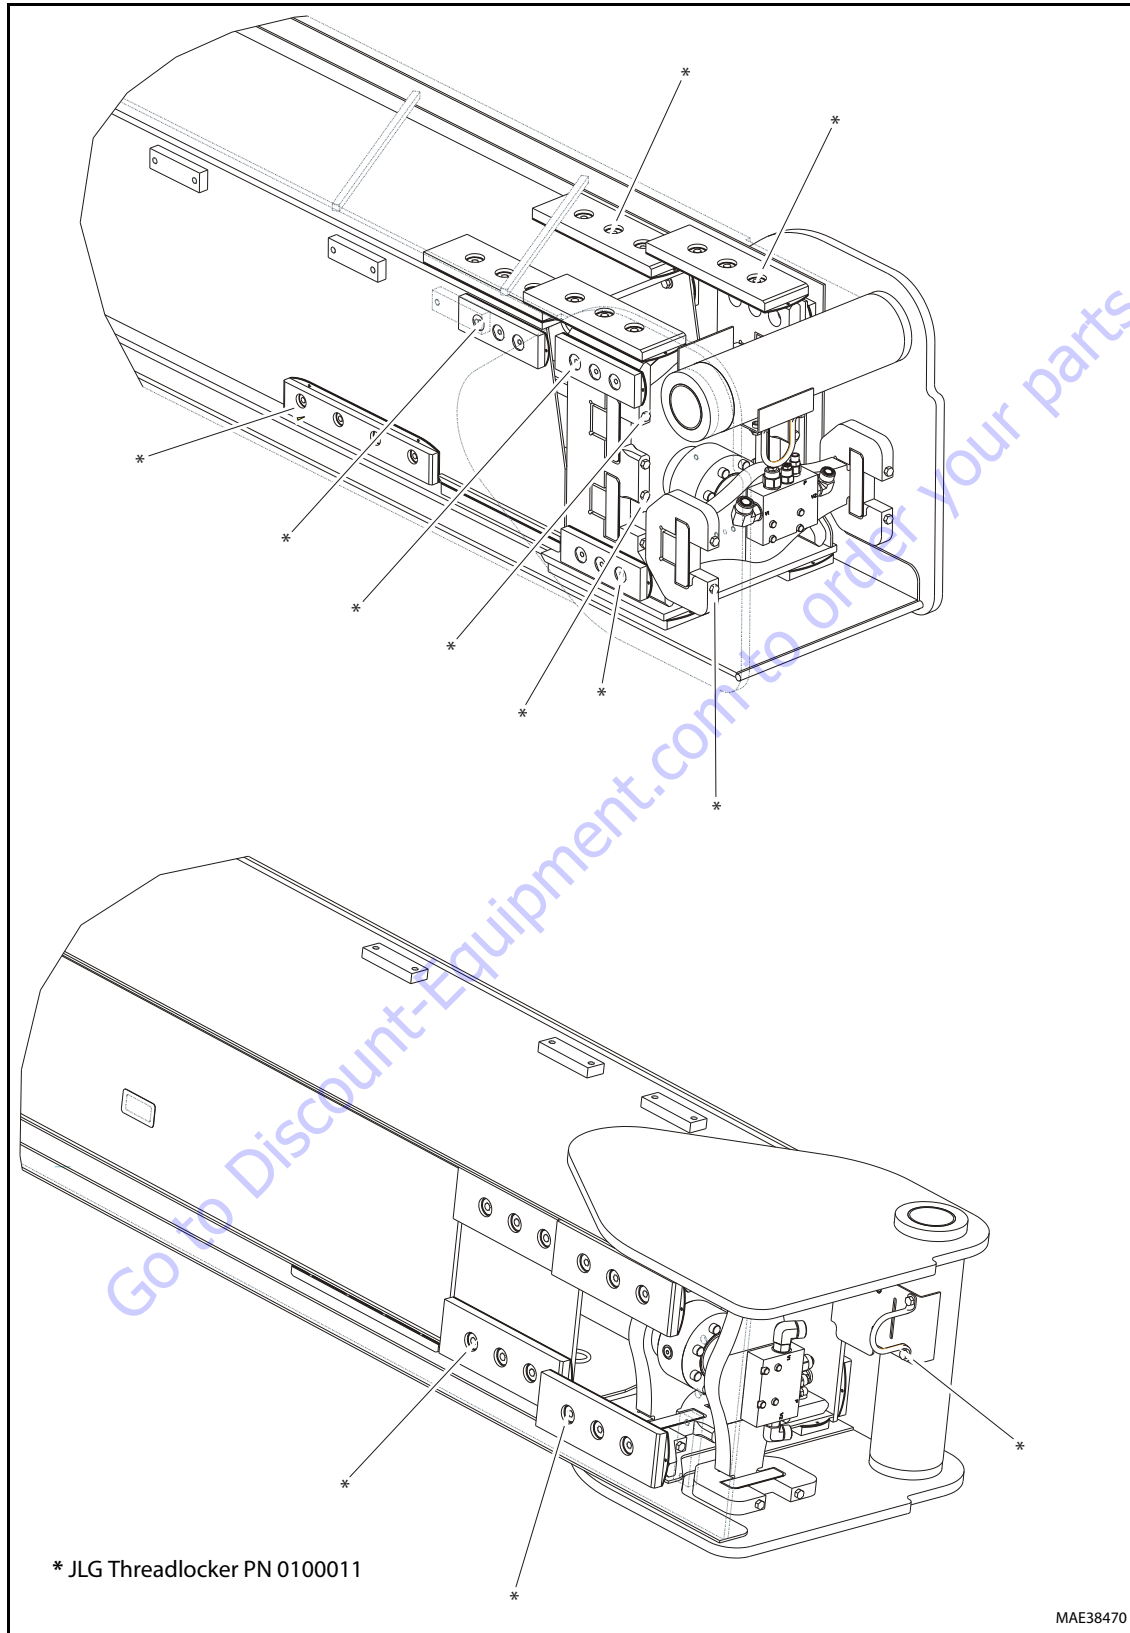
Locations for JLG Threadlocker Application - Sheet 3 of 5
